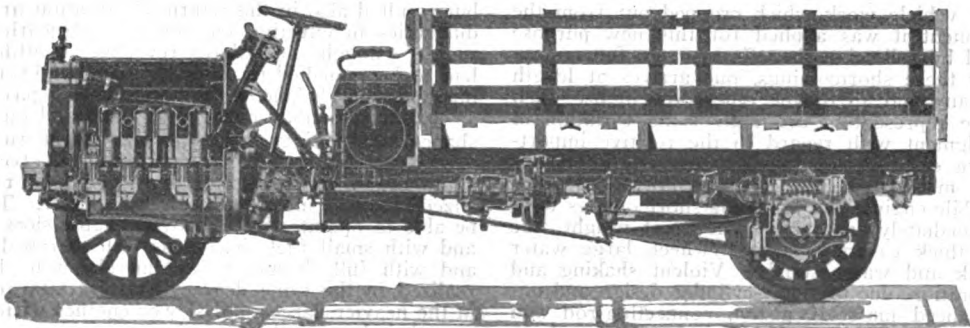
Chassis and body arrangements of motor truck with worm drive. Shown as cut through lengthwise.
